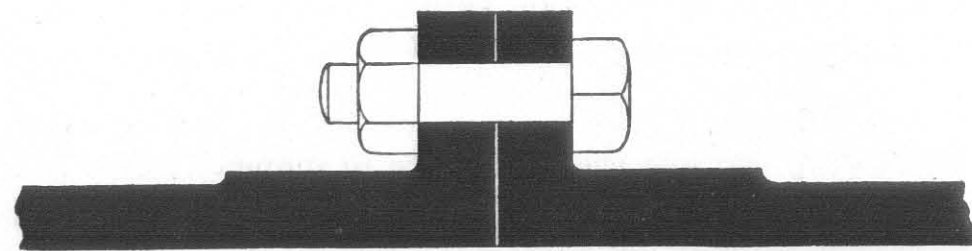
Flanged Joint in Cast-iron Pipes.
